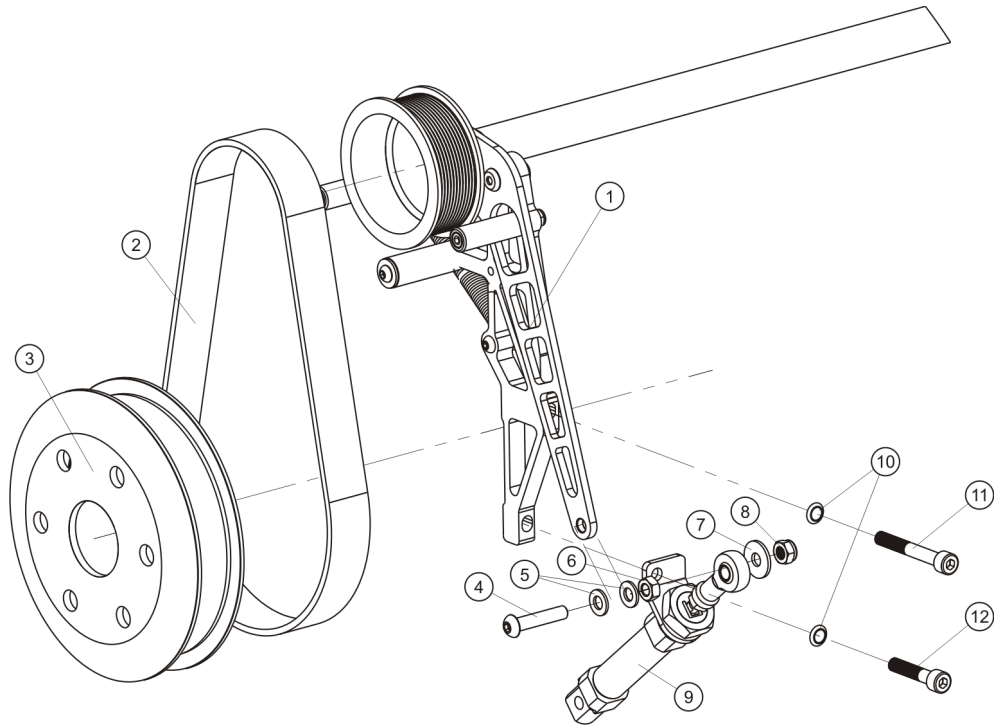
Pre-rotator clutch - belt, pulleys and actuation (lower engagement)
